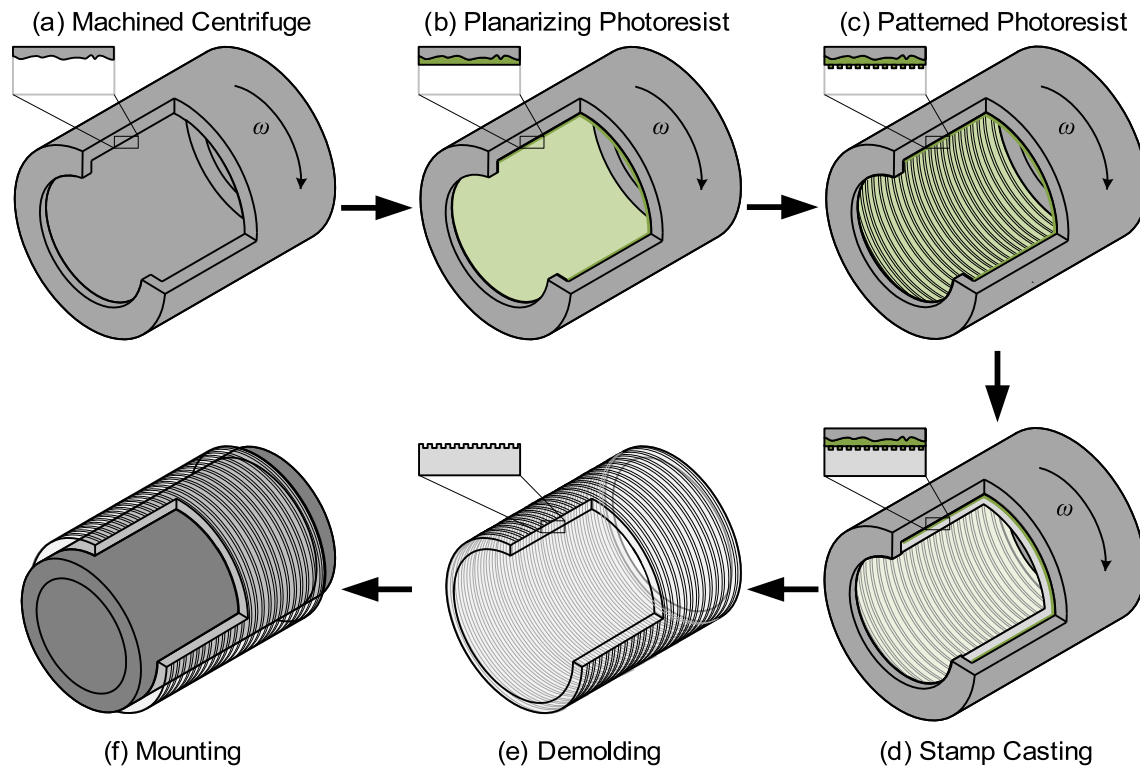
Process map showing production of cylindrical polymer stamps. (a) A machined centrifuge drum is (b) coated with a uniform layer of photoresist to planarize the surface. (c) A second layer of photoresist is patterned inside the drum to create a relief pattern. (d) A polymer precursor is cast inside the centrifuge drum, creating a cylindrical stamp with surface relief features. Finally, (e) the stamp is demolded from the centrifuge drum and (f) mounted to a shaft for use as a roll-to-roll printing tool.
